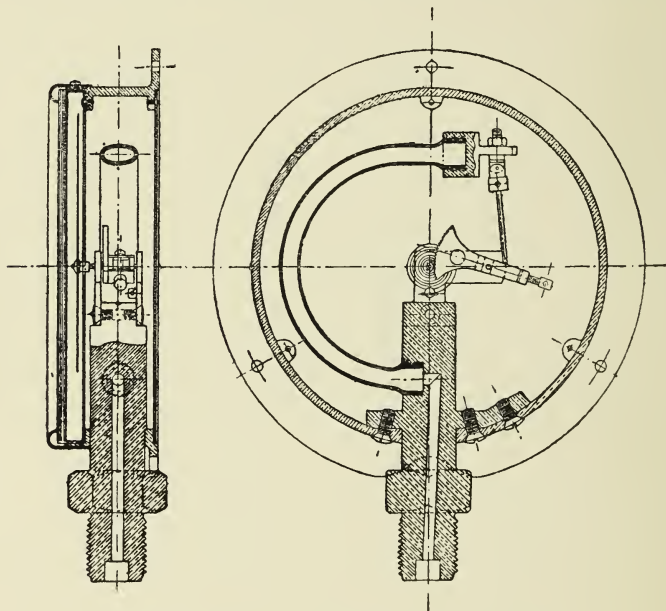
SCHÄFFER AND BUDENBERG STEEL TUBE GAUGE.
